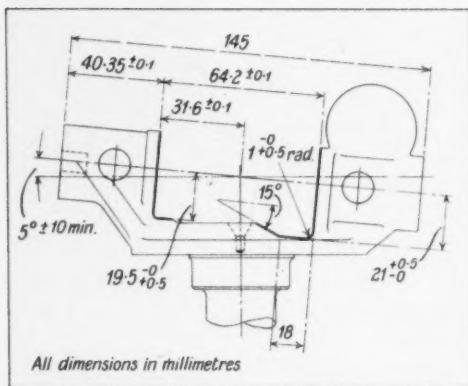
View Showing the Dimensions and Tolerances of the Fork Gap and Bosses which are Gang-Milled at the Set-up Seen in Fig. 10
